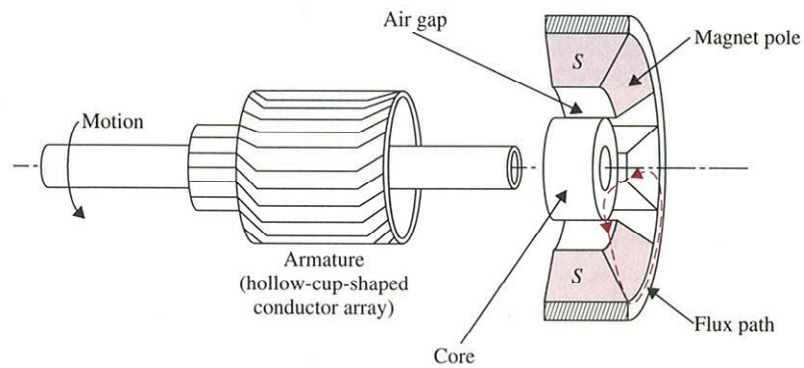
Cross-sectional side view of a moving-coil dc motor.
